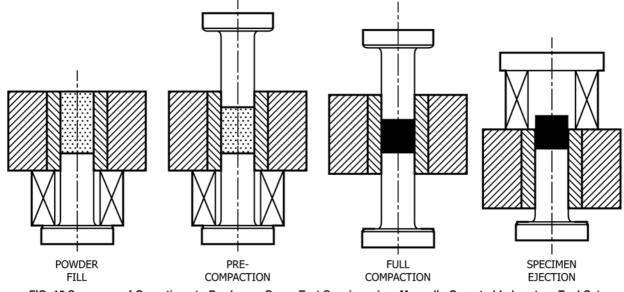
Sequence of Operations to Produce a Green Test Specimen in a Manually Operated Laboratory Tool Set
